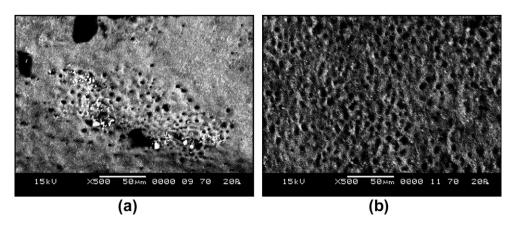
SEM fractographs of the top surfaces of tensile tested specimens; (a) as-welded; (b) heat treated.
